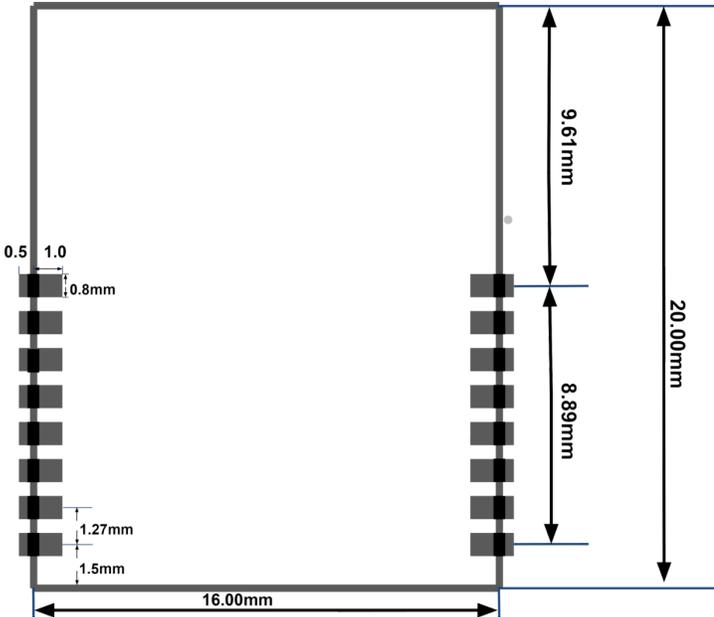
Recommended PCB Footprint of BLE Module B1BMBG22M2
